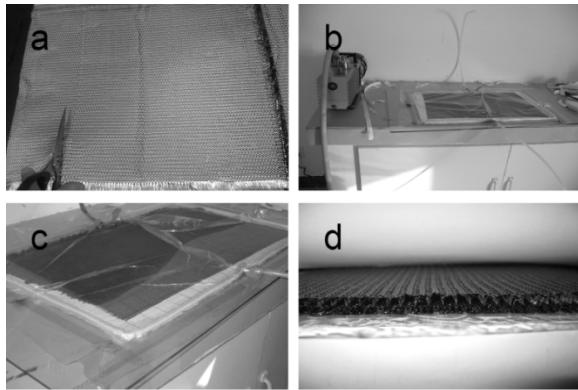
Manufacturing process of hollow integrated core sandwich composites at different stages (a) cutting dry fabric (b) vacuum bagging (c) resin infusion (d) curing.
